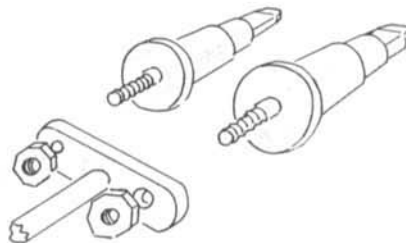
Schematic drawing of conventional positioning-pin assembly.
